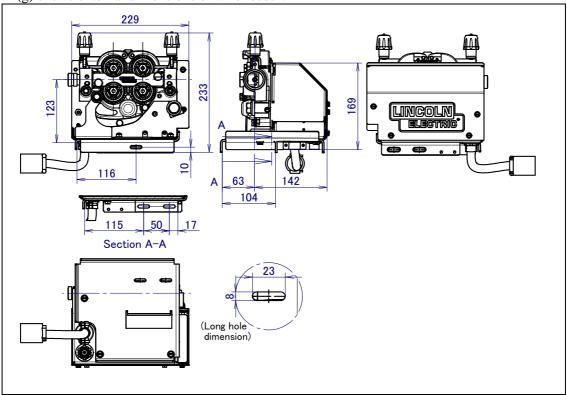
(g) Outer dimensions of wire feeder (Auto drive 4R100)
